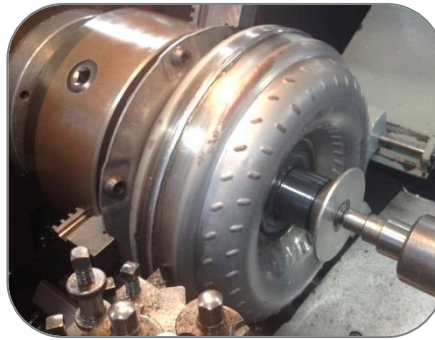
Using a lathe to remove the weld sealing the two halves of the torque converter
